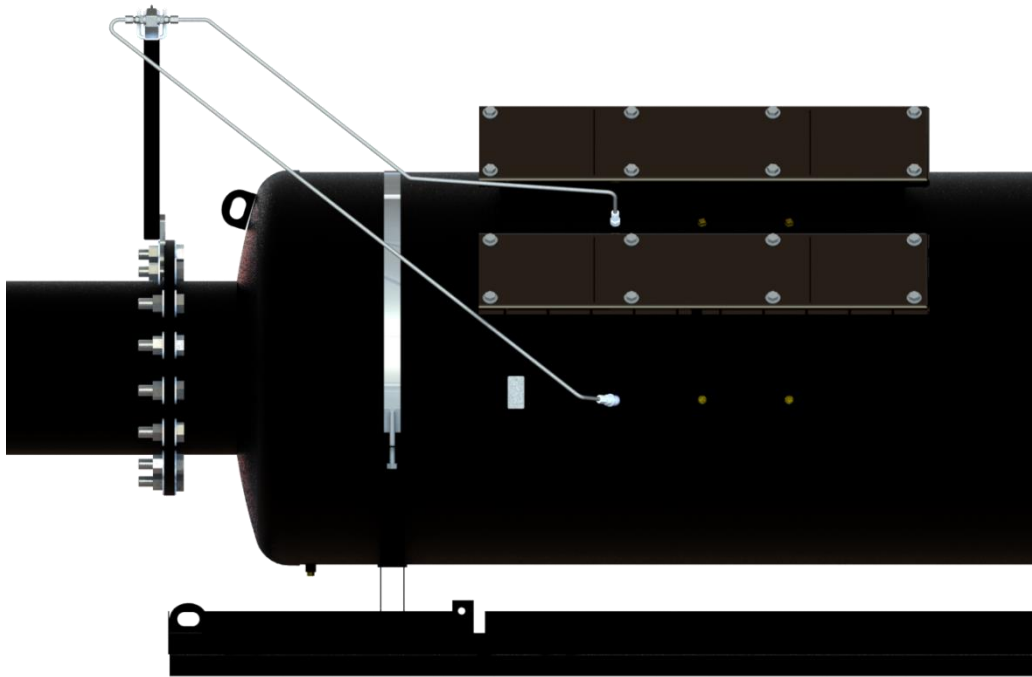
Proper Differential Pressure Sensor Mounting (Side View)
